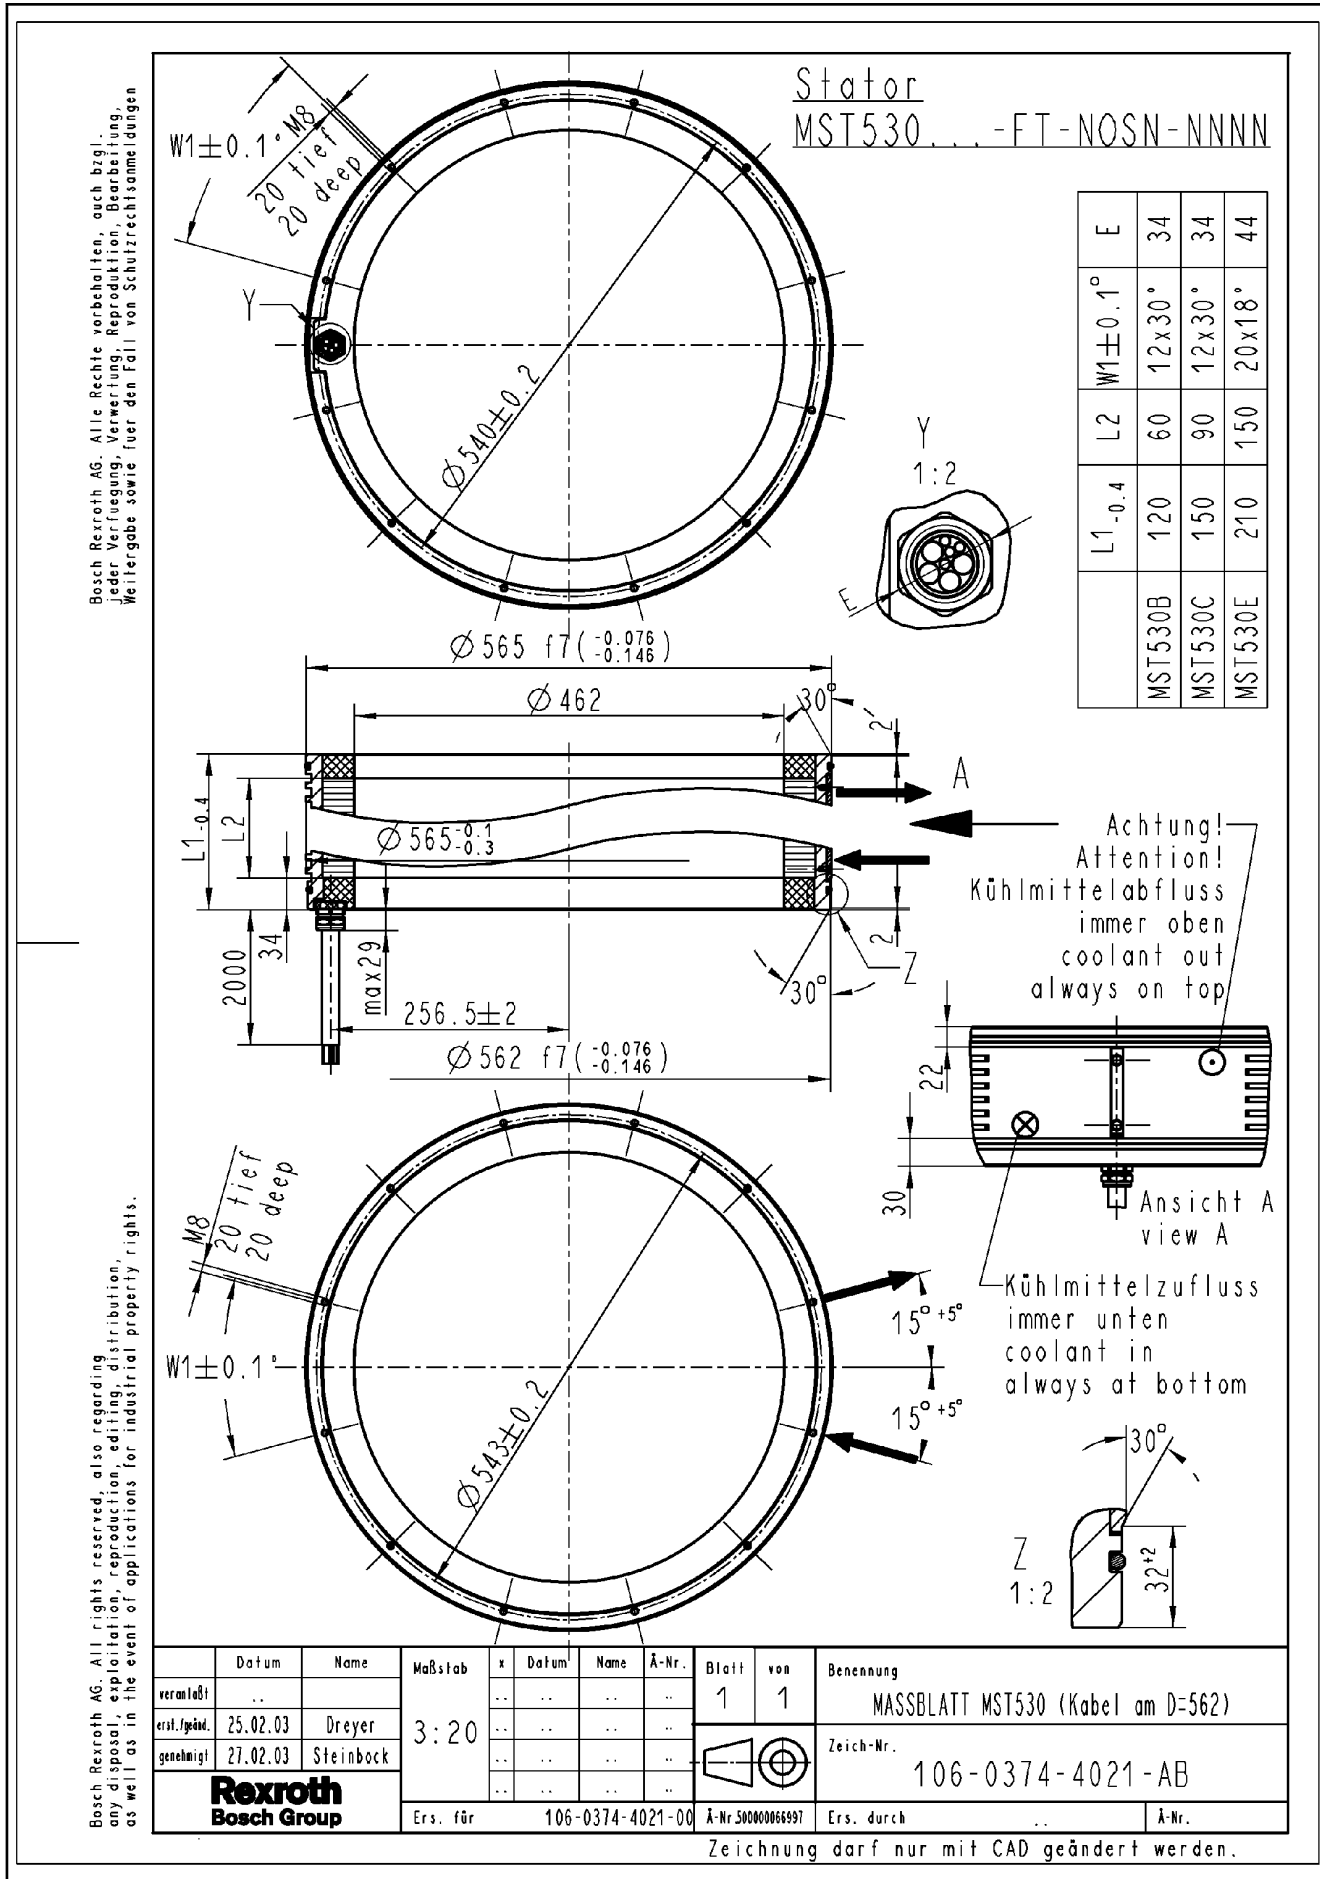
Dimension sheet MST530, electrical connection "SN"
